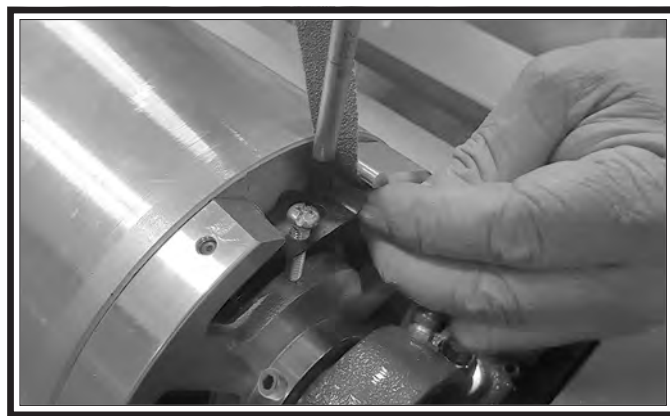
Example of inserting leading end of sandpaper under spring clip.
